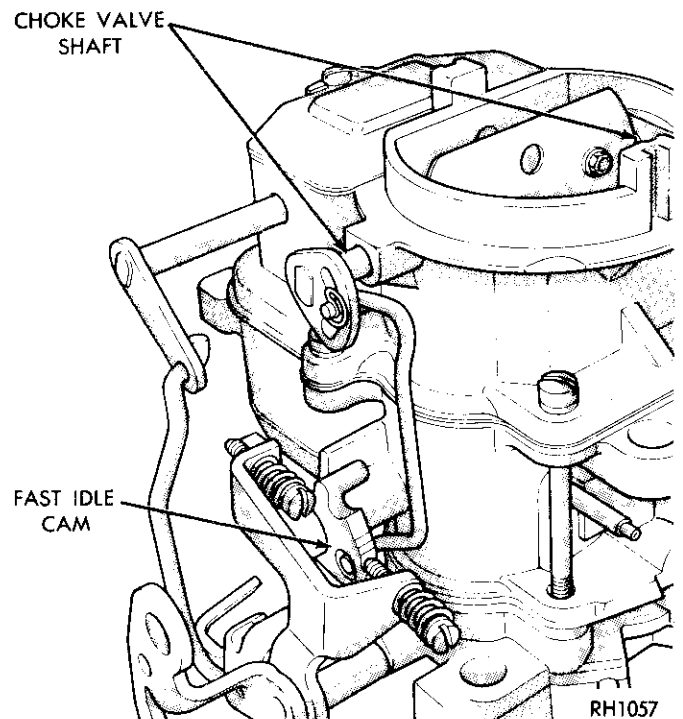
Choke Valve Shaft and Fast Idle Cam—4.2L
